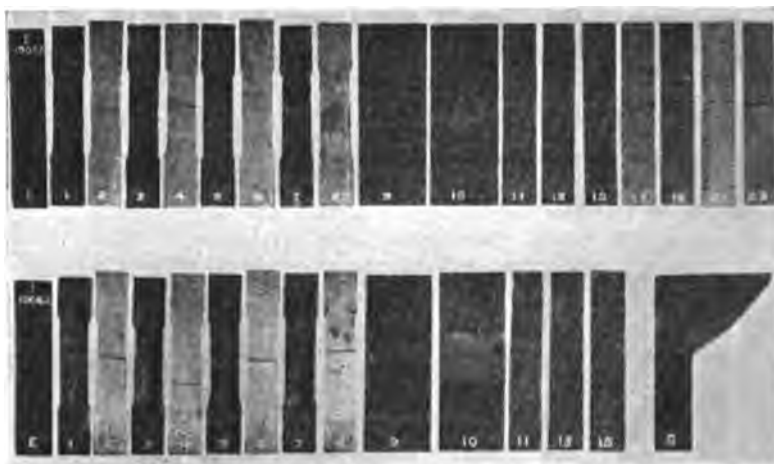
Showing tension and transverse test specimens after test, sections E and F, rail 10062. Specimens 1 to 8, inclusive, tension test specimens. Specimens 9 to 23, inclusive, transverse test. Note the manner in which the failures followed along lines of well defined seams.
